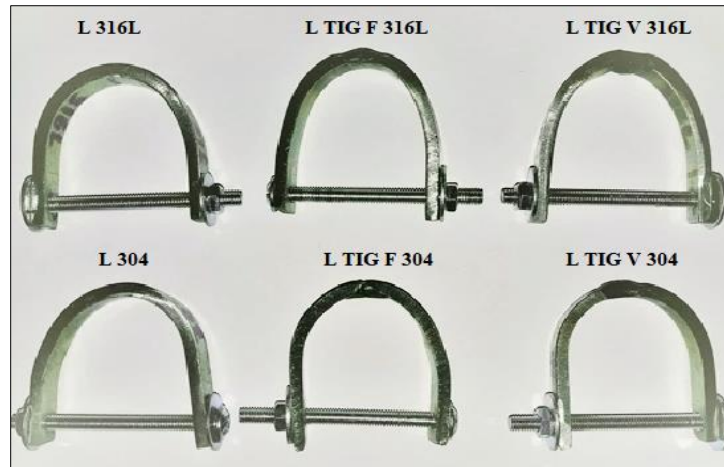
Standard U-bend specimens used in SCC testing of AISI 304 and AISI 316L austenitic stainless steels
